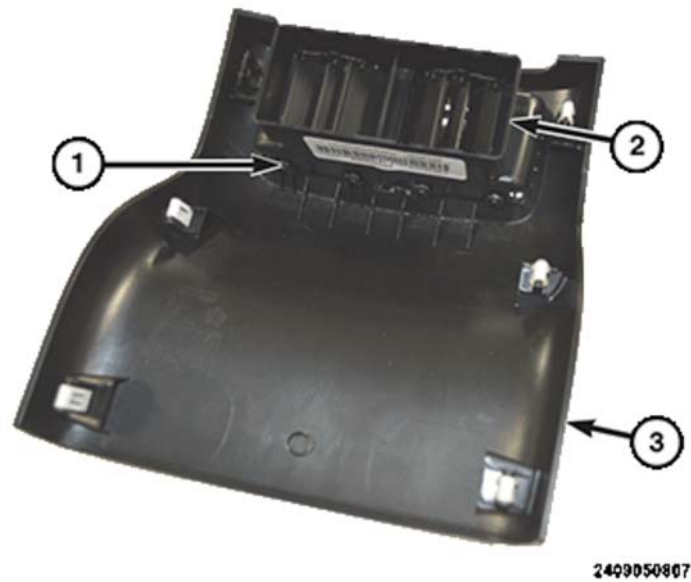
Air Outlet, End Cap & Retaining Tabs
